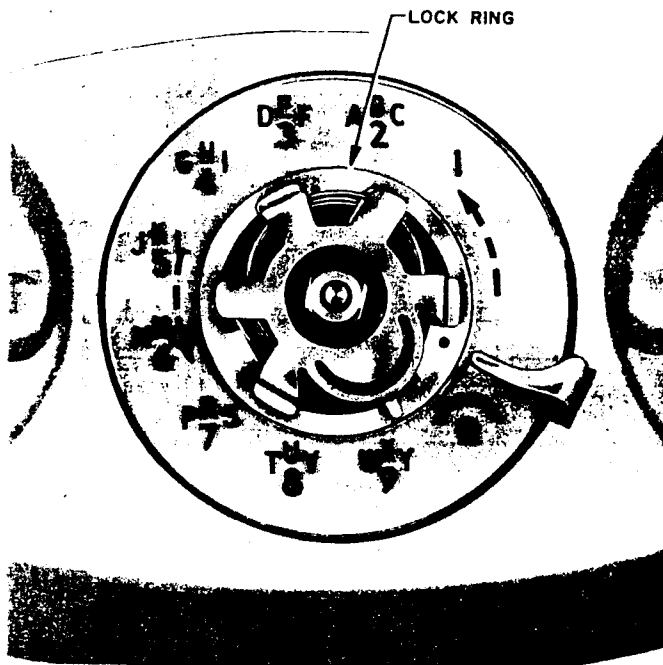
8-Type Dial, Fingerwheel Removed to Show Lock Ring
